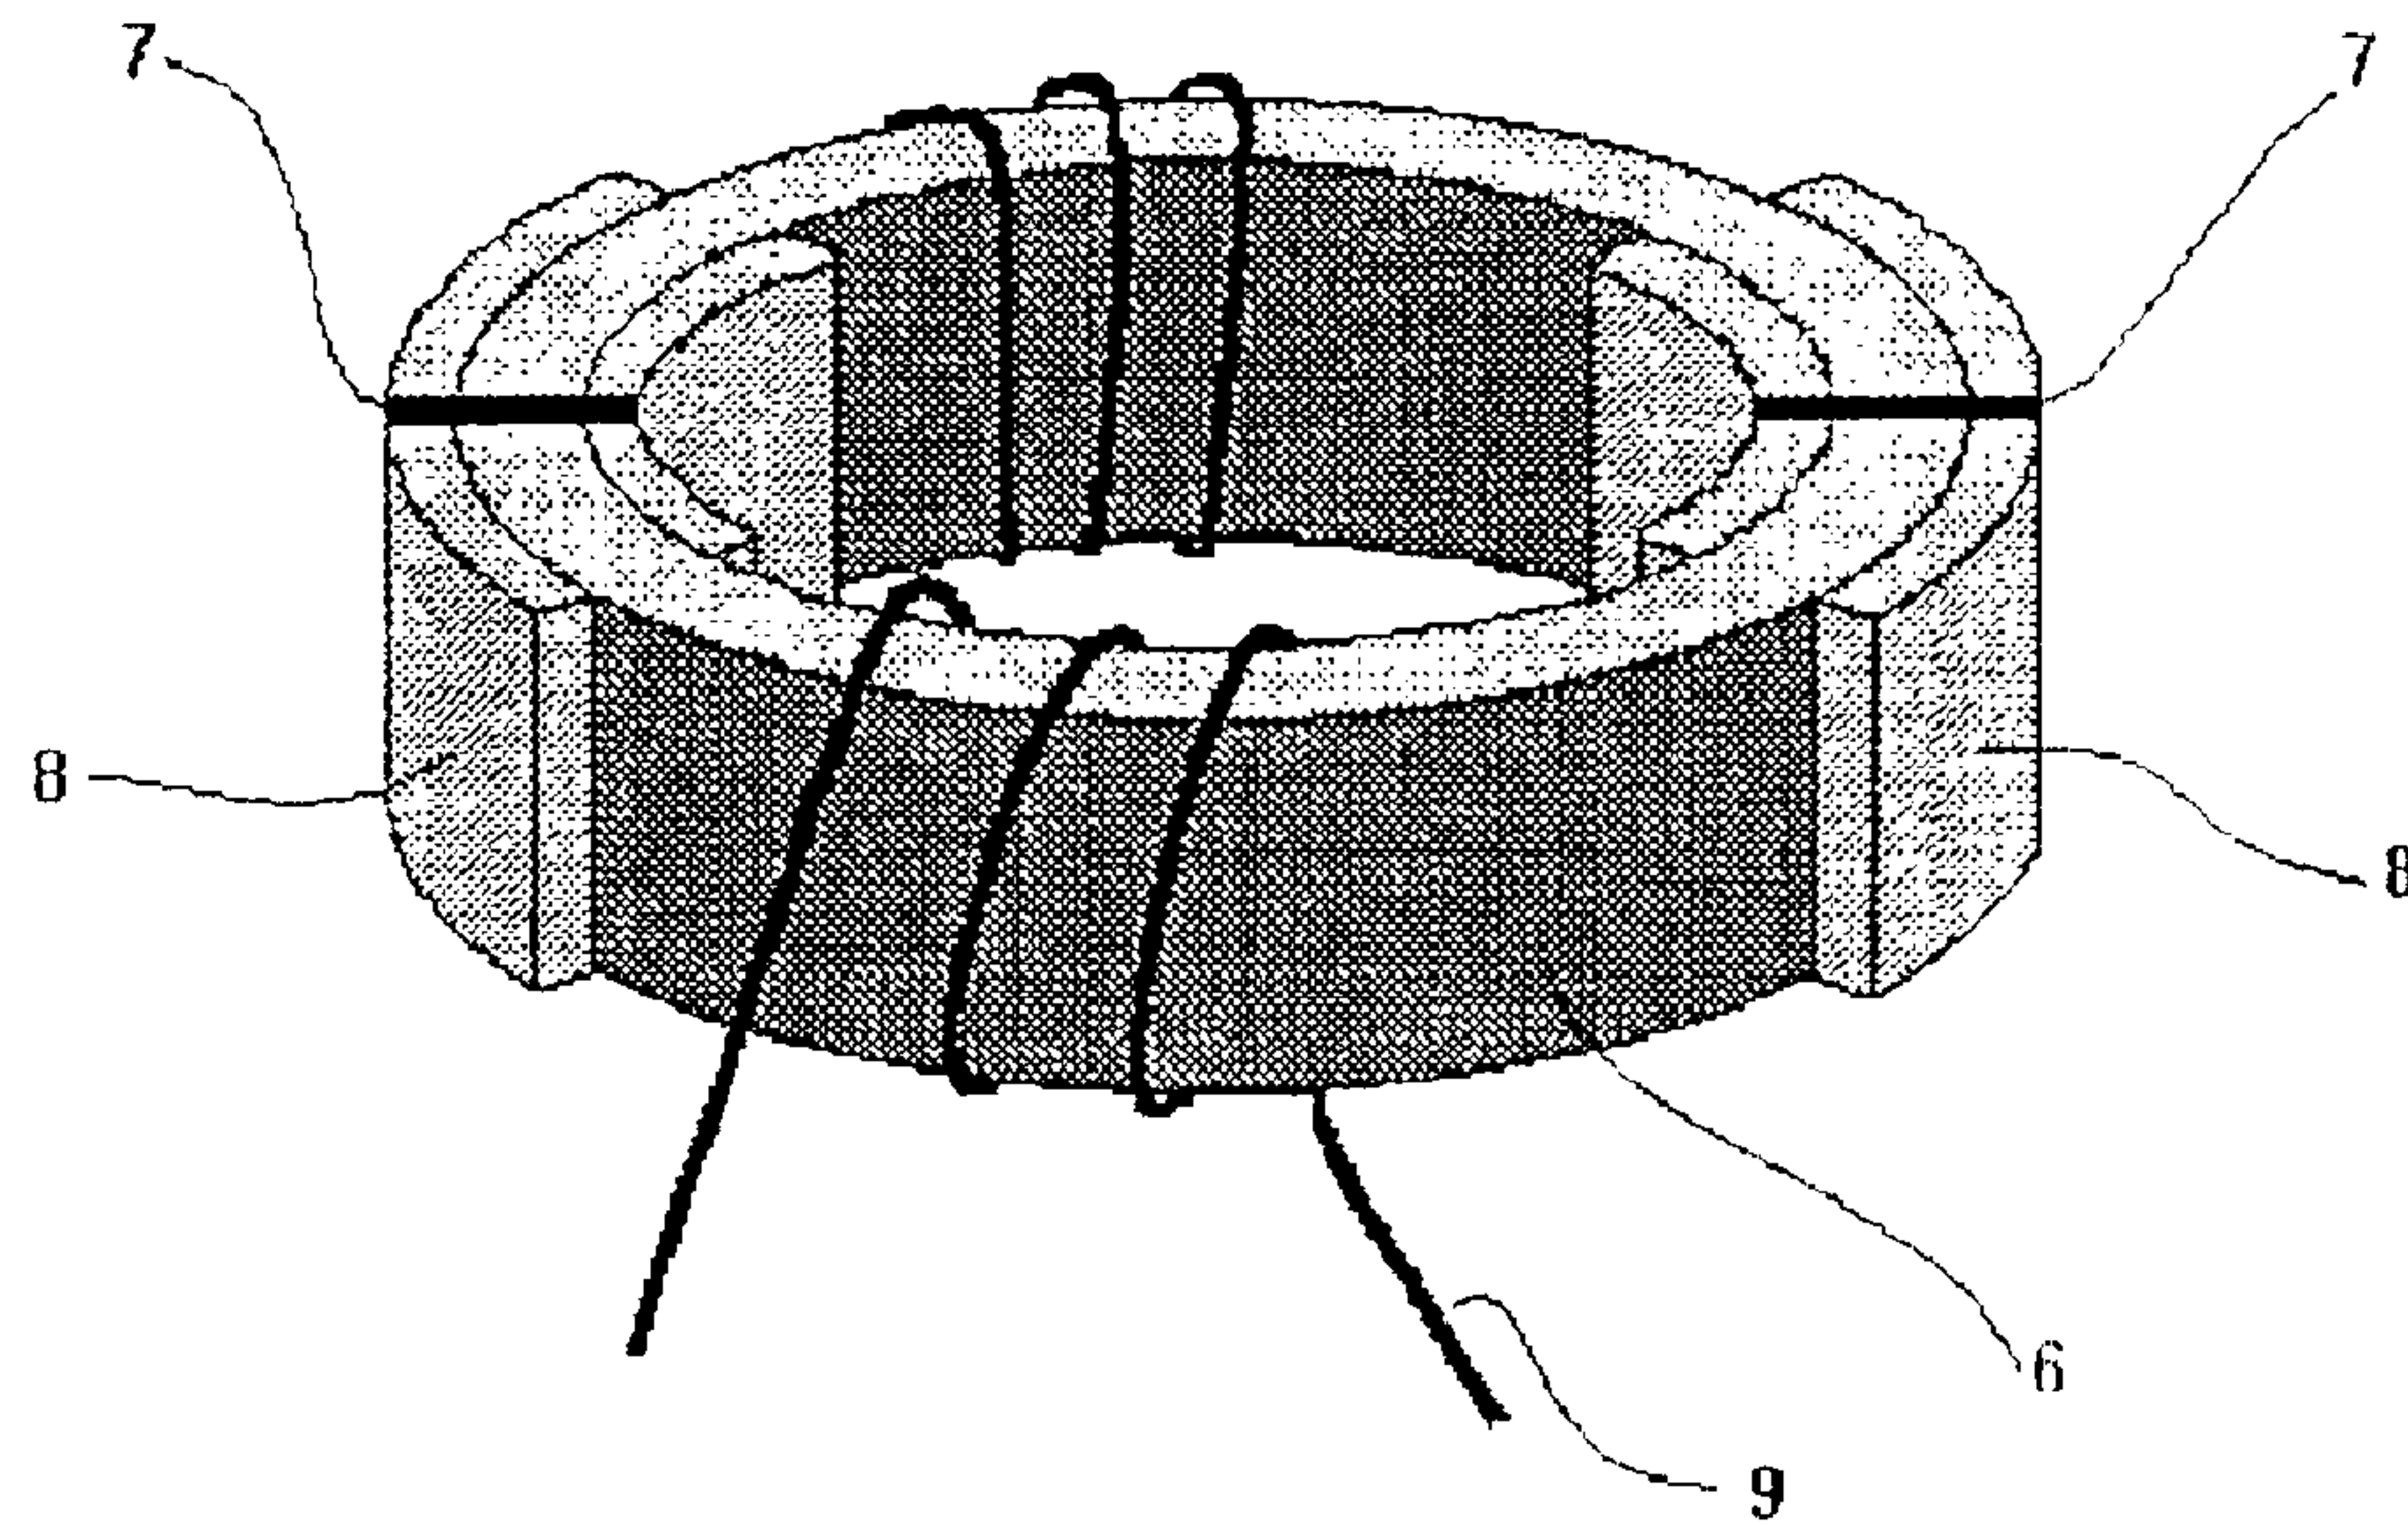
TOROIDAL FORM OF MAGNECORE WITH SKEWED MAGNETS
